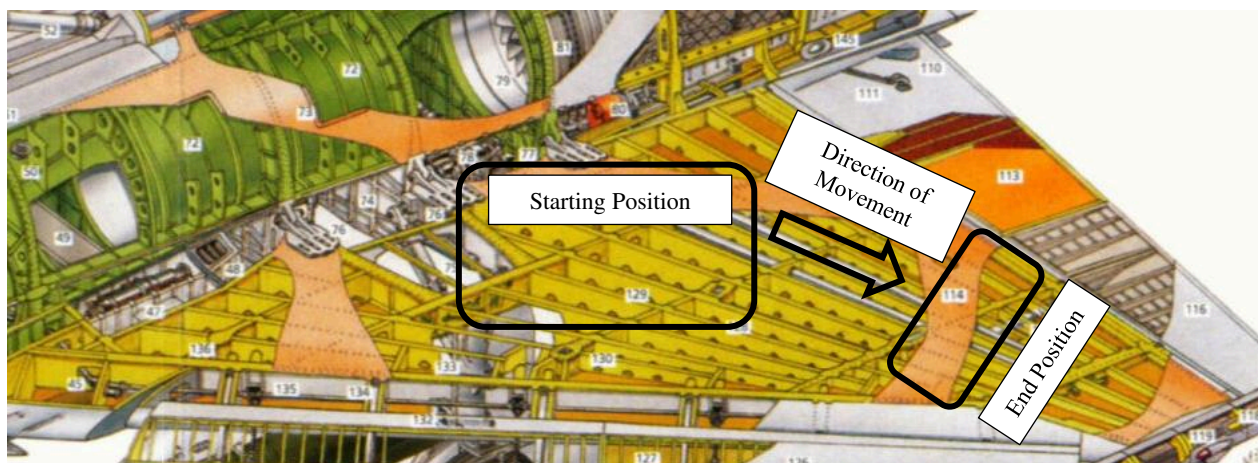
Typhoon wing structure illustrating robot direction of movement (Eurofighter Typhoon Cutaway Drawing, n.d.).
